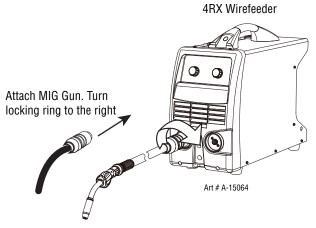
Attaching the Tweco Professional MIG Gun (Euro)
